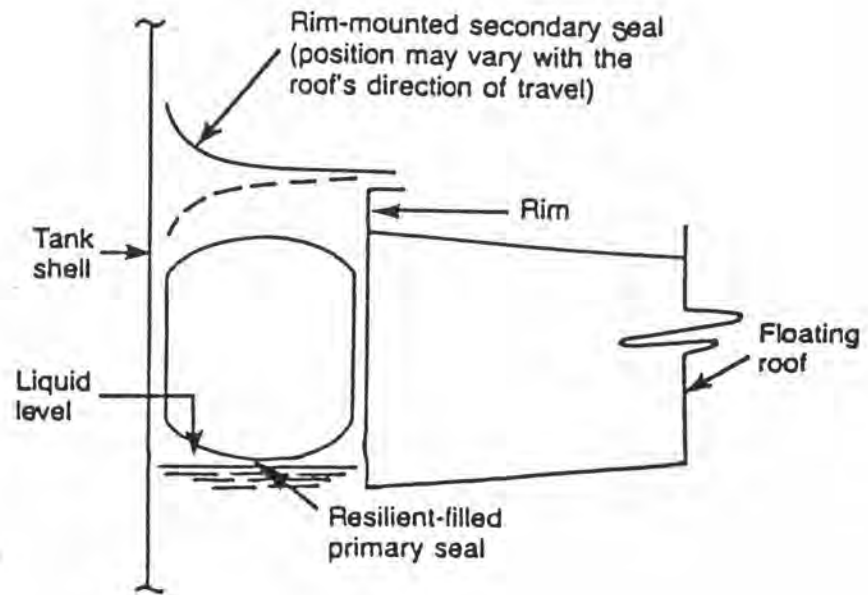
Resilient-Filled Primary Seal with Rim-Mounted Secondary Seal [3]
